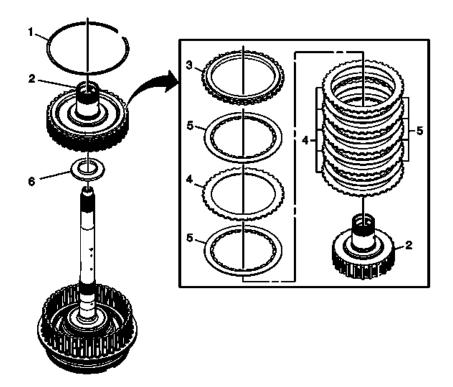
View Of 3-5 Reverse Clutch Plates Courtesy of GENERAL MOTORS COMPANY
